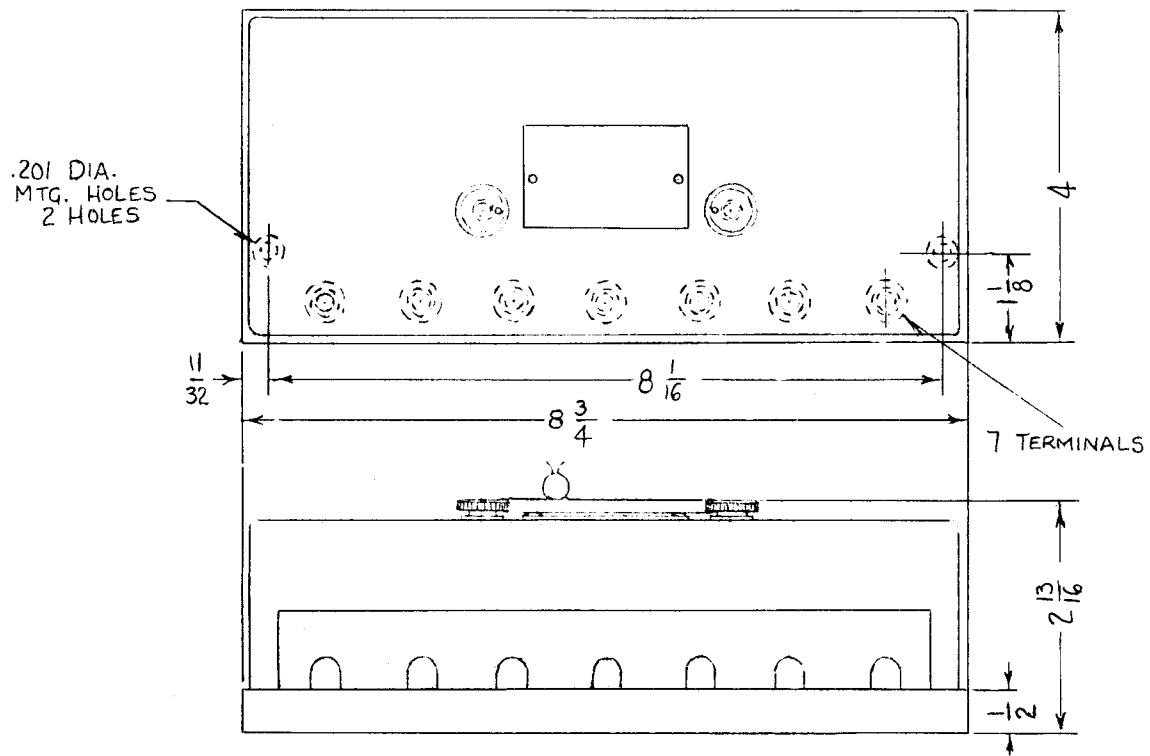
Outline and Dimensions For Types K-3, K-4, K-7 and K-9
